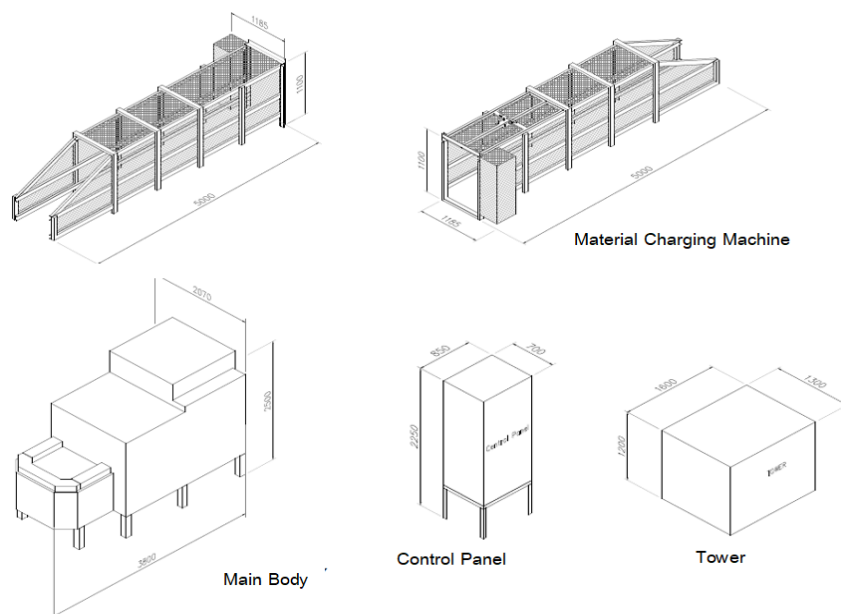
The test case consisting of Main Body, Charging Machine, Tower, Parts and Control Panel.
